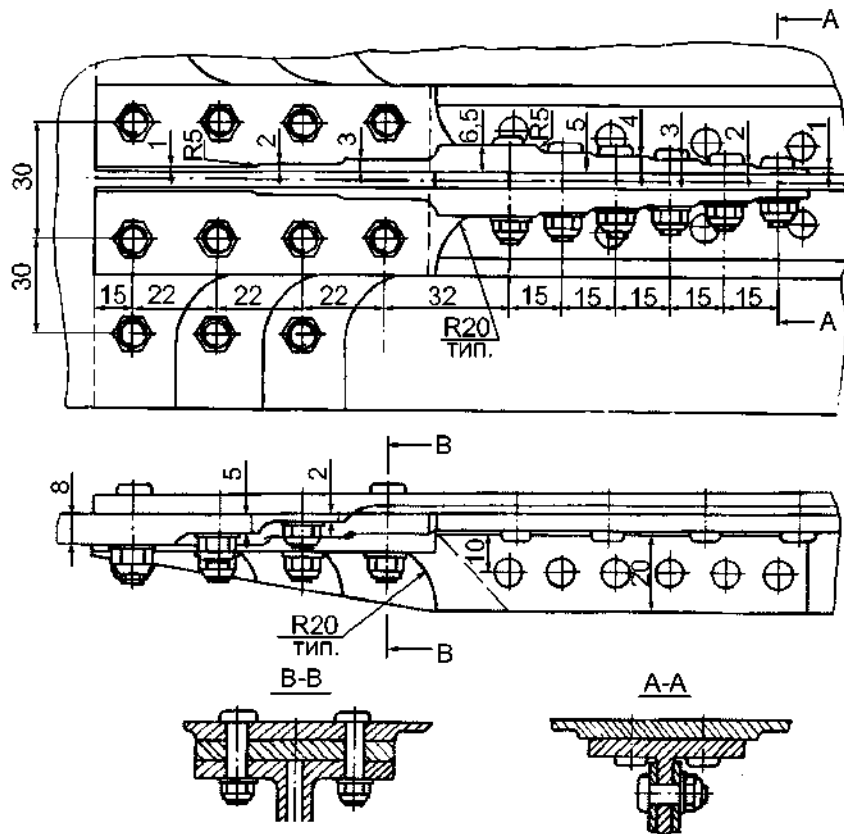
Specimen of stringer panel-to-break profile joint (variant 3)
